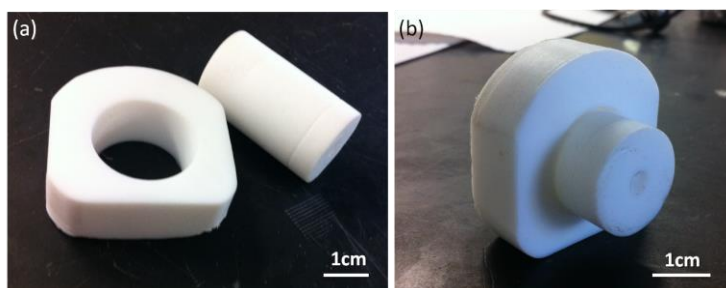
Photographs of the mould produced, with the two components, including an inner cylinder with diameter 2 cm.
